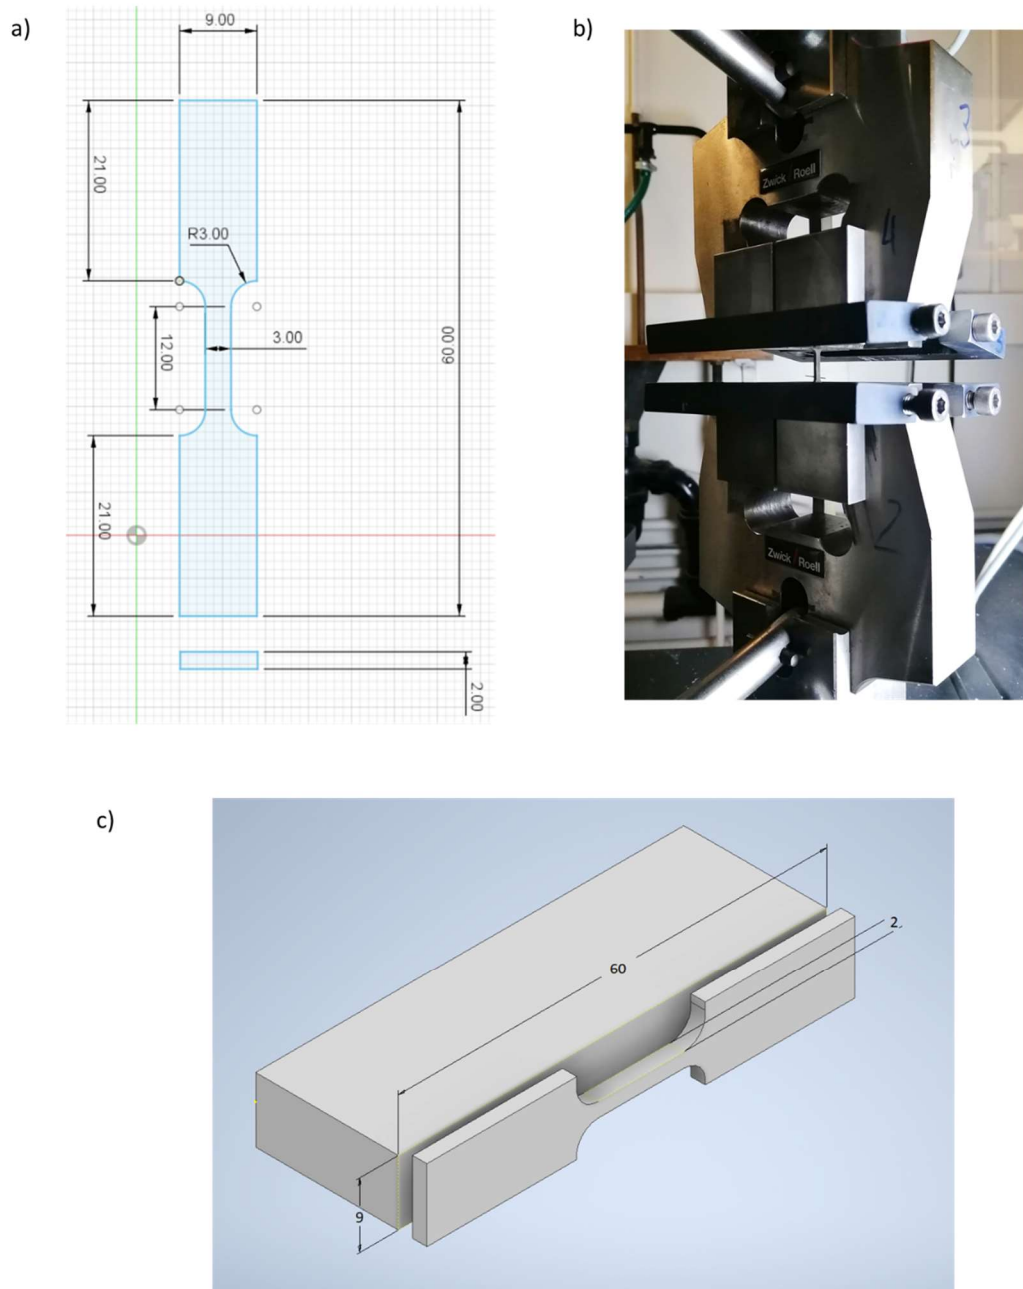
a) Drawing of tensile samples used in the testing b) Grips with clamps type “U” to avoid slipping during the test, c) PSC sample machining orientation to obtain the tensile specimen.
